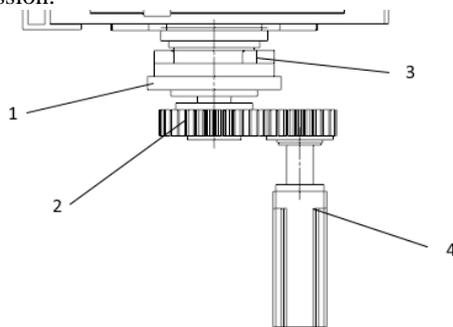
FIGURE II. DESIGN FIGURE OF ROTARY SHAFT OF MANIPULATOR: 1. RETARDER; 2. GEAR; 3. BALANCE BLOCK; 4. ELECTRIC MACHINERY.
